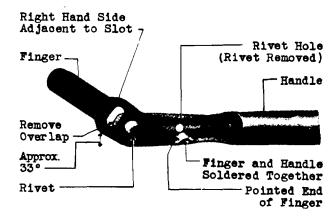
Method of Modifying the No. 451A Bank Contact Cleaner
